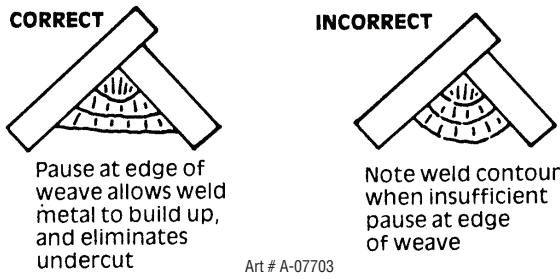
Examples of Vertical Fillet Welds
